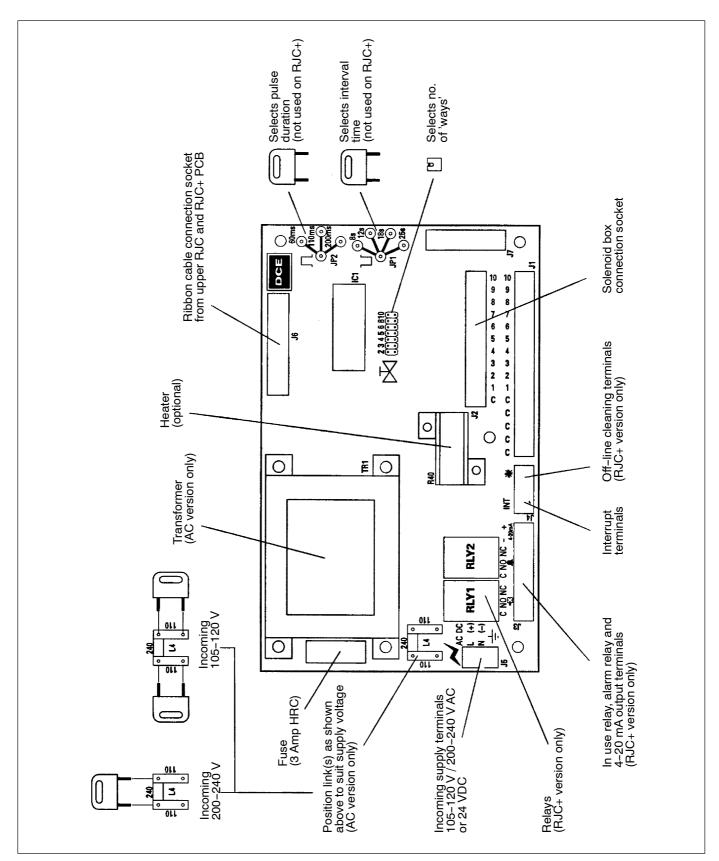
Lower PCB layout for RJC and RJC + controllers
